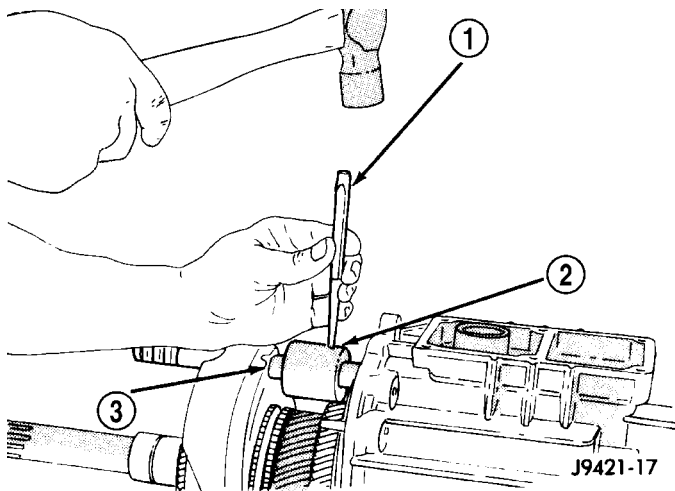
SHIFT SHAFT LEVER & BUSHING ROLL PIN
